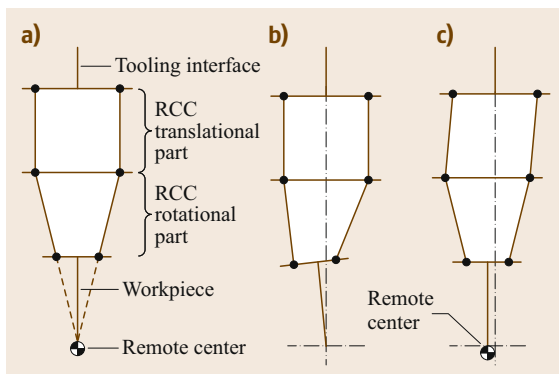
(a) Planar representation of RCC. (b) Rotational part of RCC allowing workpiece to rotate. (c) Translational part of RCC allowing workpiece to translate
